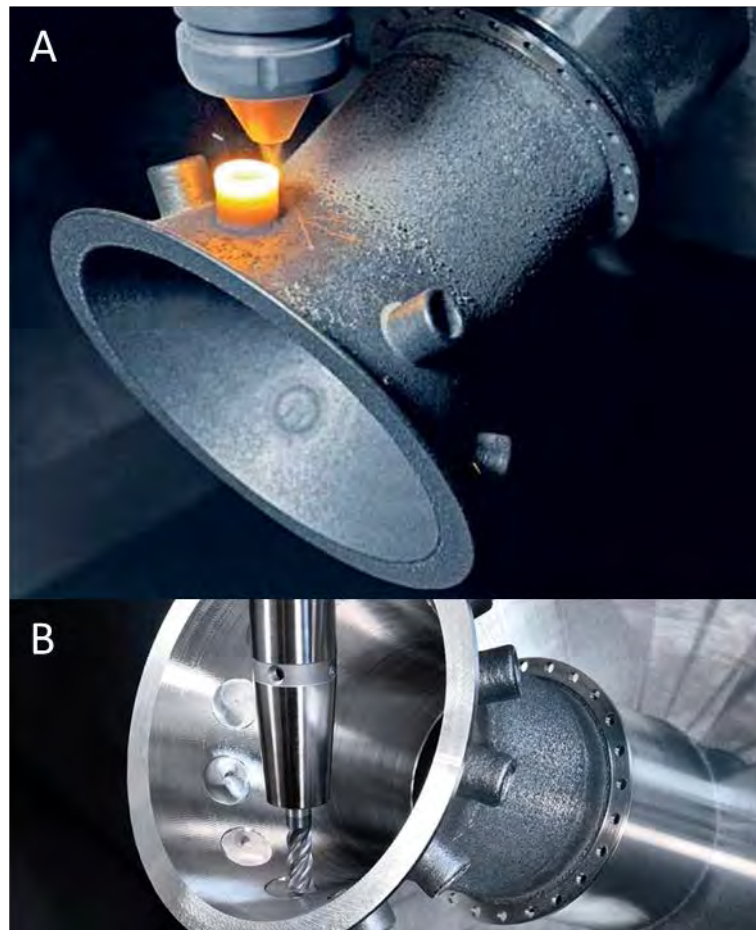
Laser metal deposition manufacture of helicopter engine combustor housing using 5-axis Trumpf DMD machine at TWI Yorkshire [20]
